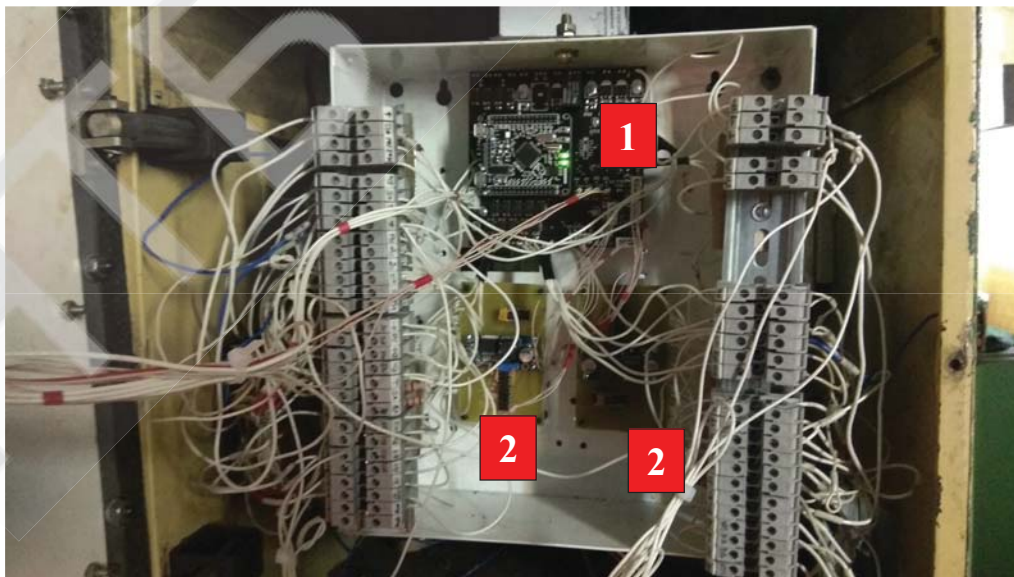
Location of the drive control PCBs (1 – motor control board, 2 – encoder control board)
